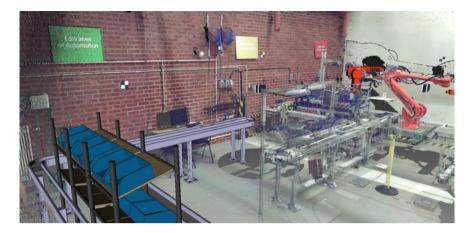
A hybrid point-cloud and CAD planning environment to position a conveyor in the existing factory layout
